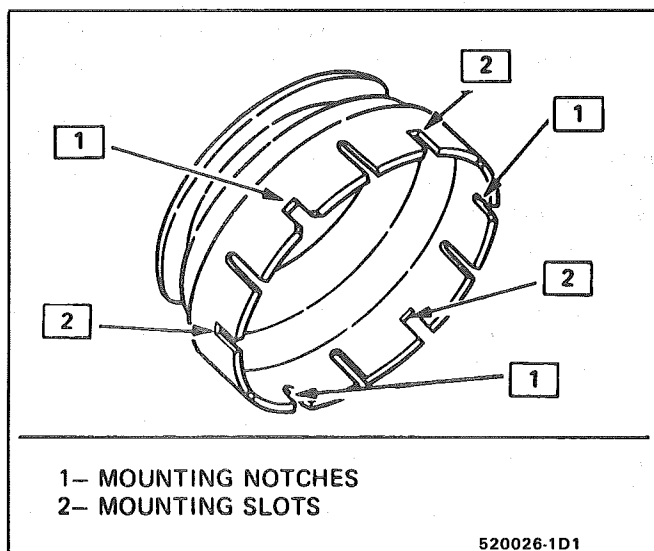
Pulley Rim Mounting Location Detail - Optional Design
